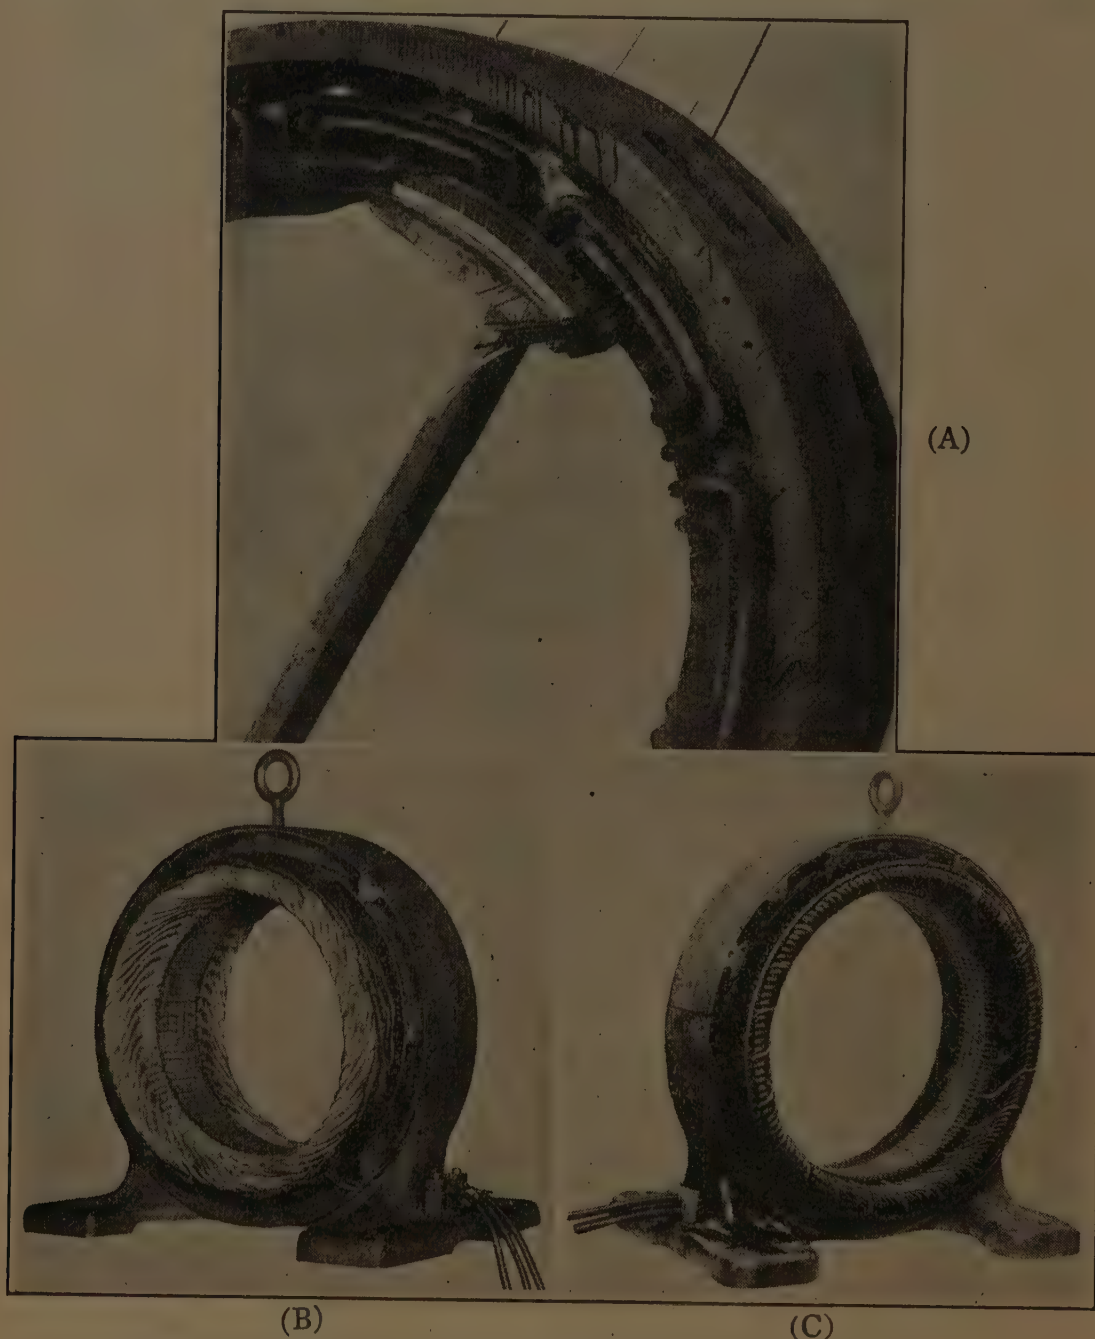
(A) Hand-wound, threaded type of winding.
